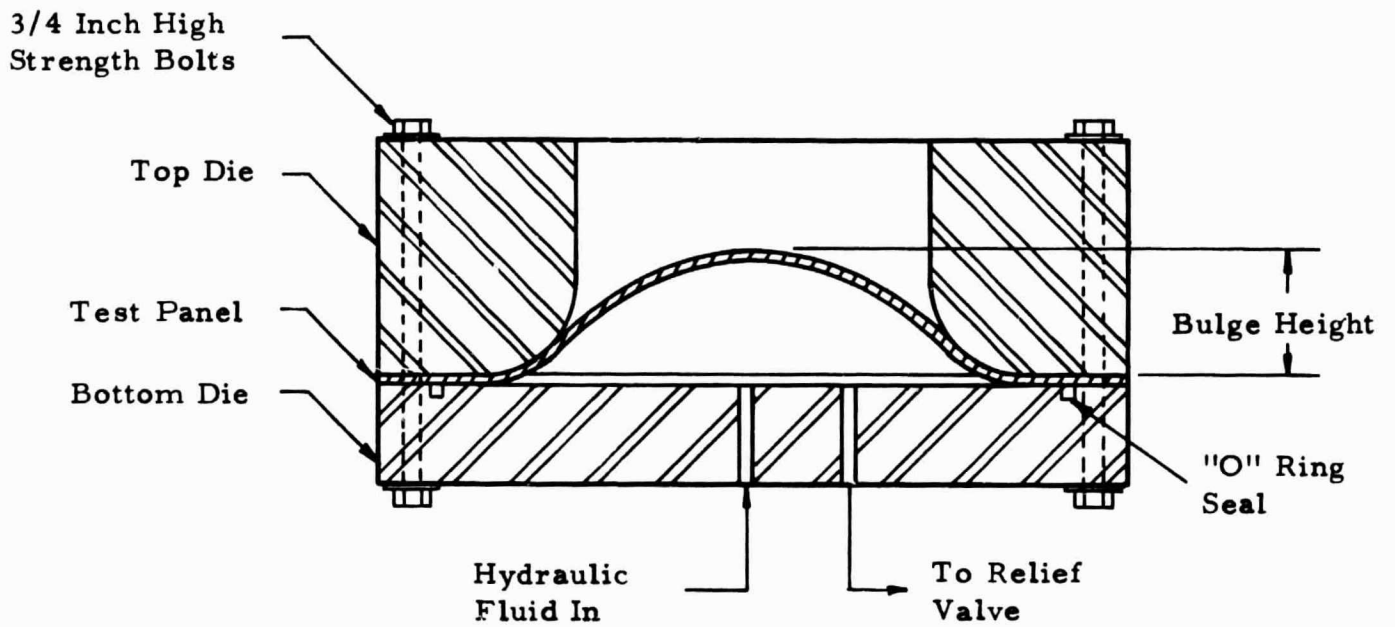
SCHEMATIC DIAGRAM OF HYDRAULIC BULGE TEST FIXTURE
